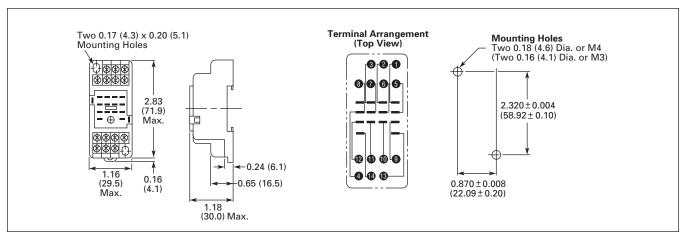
D2PA4 Socket for D2PR5 DPDT Latching Relays Only — Approximate Dimensions in Inches (mm)
